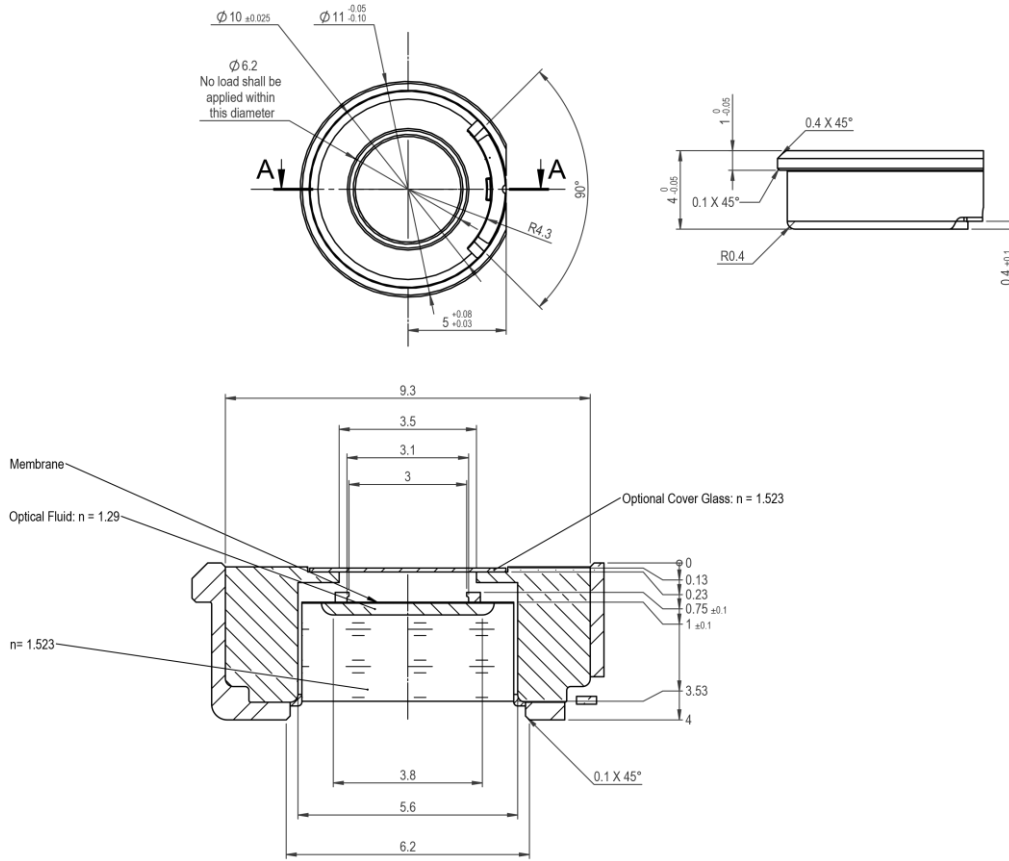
Mechanical drawing of the EL-3-10-XXX-26D-OEM lens
